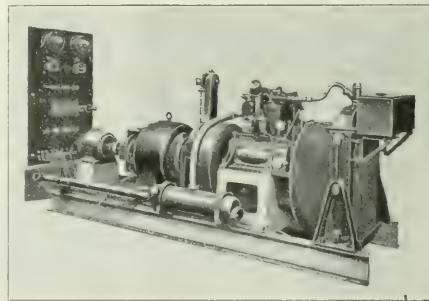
SELF-CONTAINED A.W.P. WELDING PLANT.
